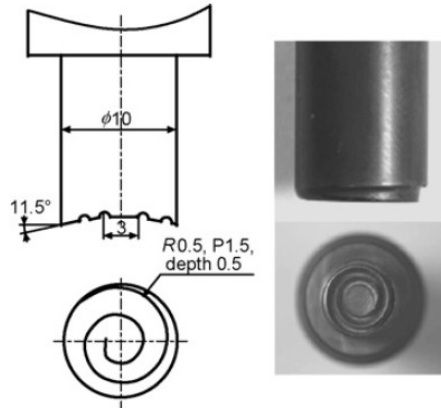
Dimensions and tool configuration developed by Tozaki et al. [22].
